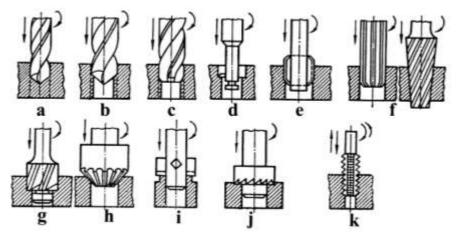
Main operation of hole machining: a – drilling; b – boring; d, e – enlarging by cutting tools; f – reaming; g – counterboring; h – countersinking; i, j – spot-facing; k – threading
